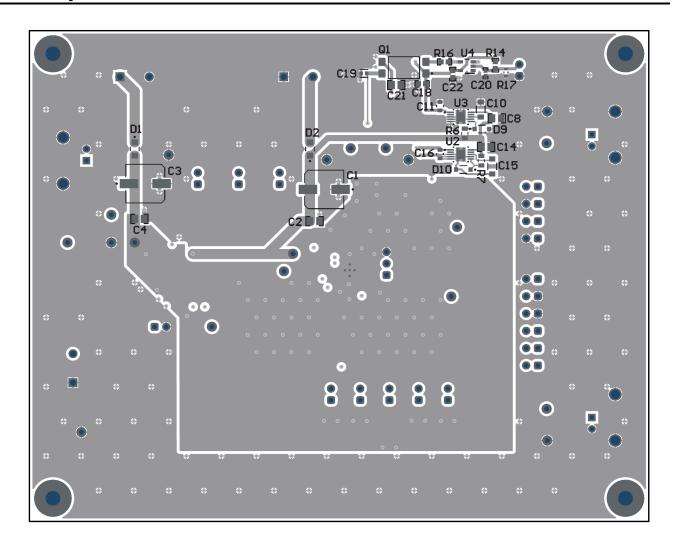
Bottom-Side View of the OPA598EVM PCB
